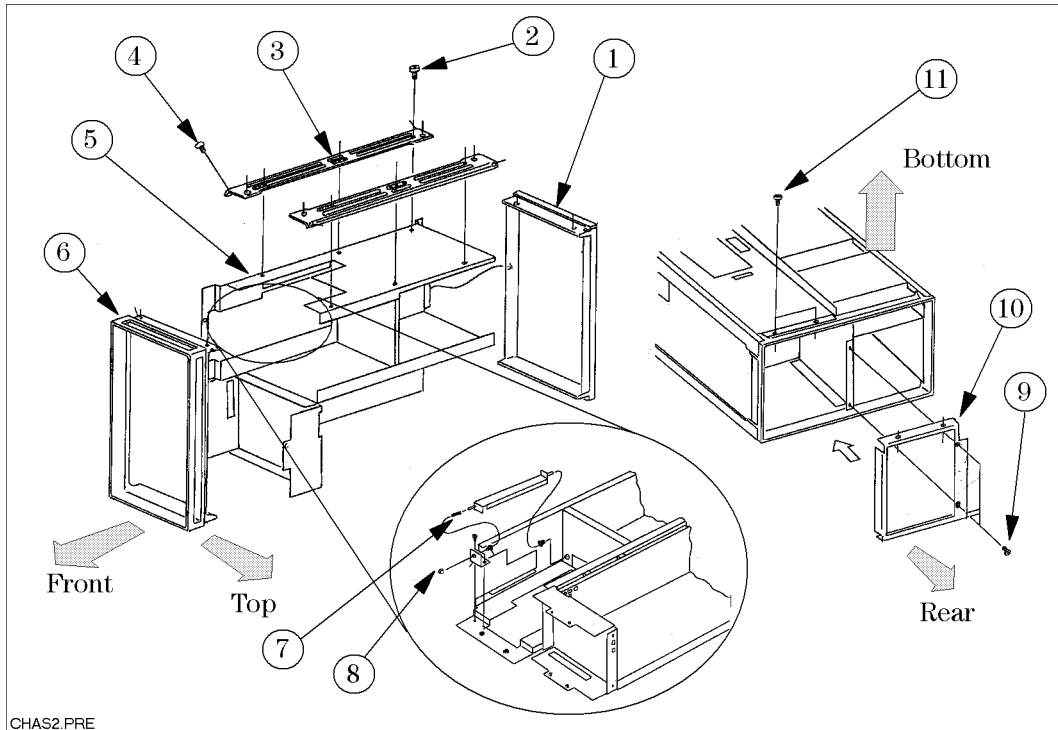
HP 4155B/4156B Chassis Parts Location (2 of 2)
